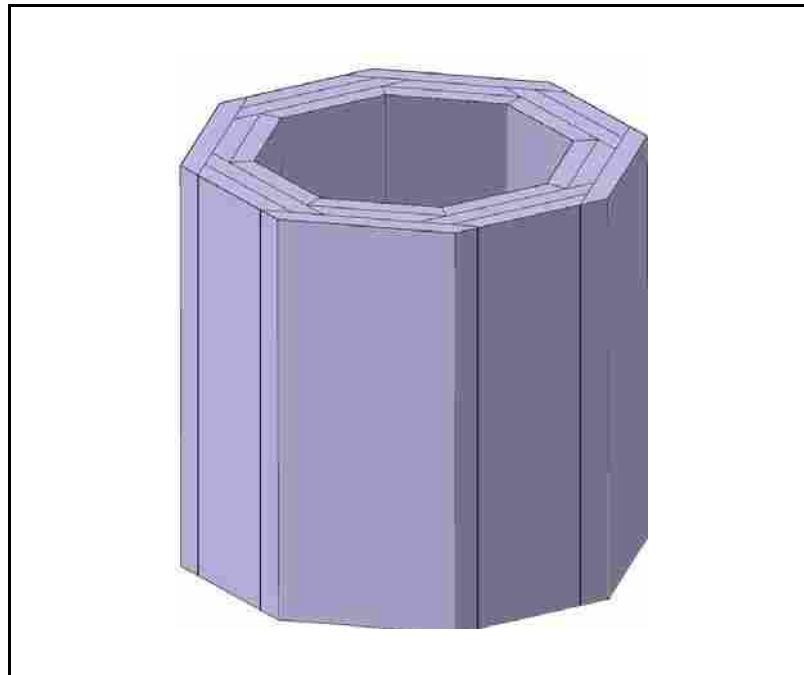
Assembled insulation panels that surround the main reactor tube and the hot sections of the electrical heating elements.
